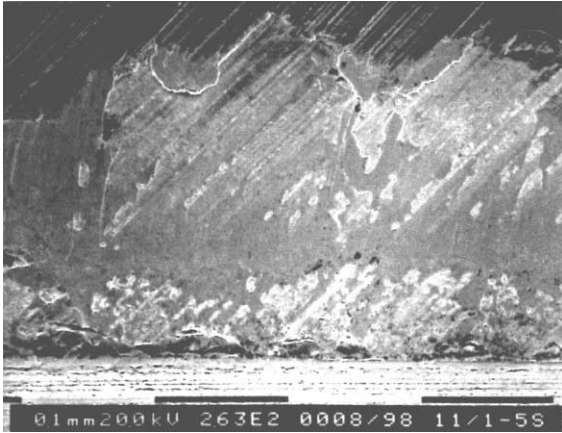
An SEM image of Tool B after cutting for 5 s, showing galling, coating delamination and pitting on the rake face and adhesion of relatively large chip particles at the cutting edge (at 25 m/min and 0.08 mm per tooth).
